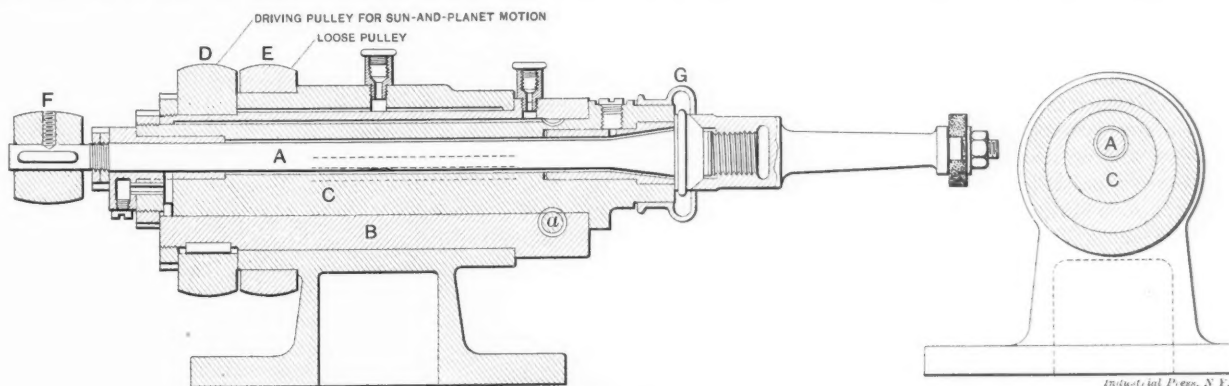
Internal Grinding Head Construction employed by Le Progres Industriel
